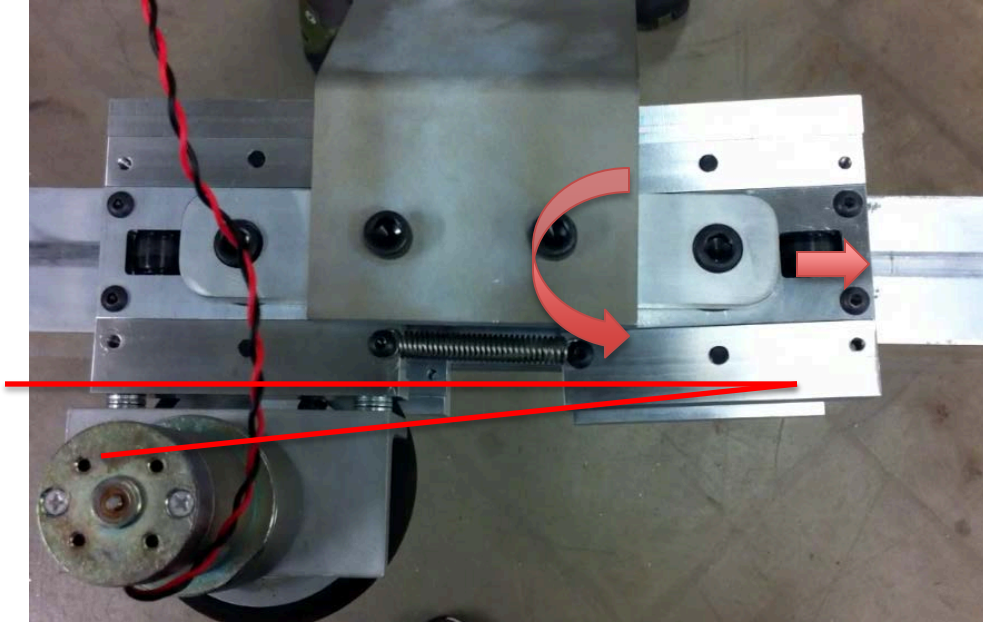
Dual drive carriage failure mode caused by unwanted twisting at the pivot points
